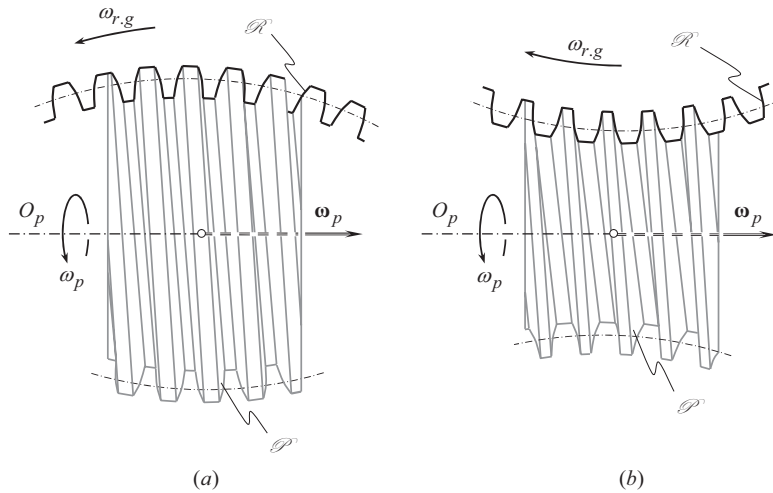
Geometrically accurate crossed-axes worm gearing composed of helical involute gear and conical involute worm.
